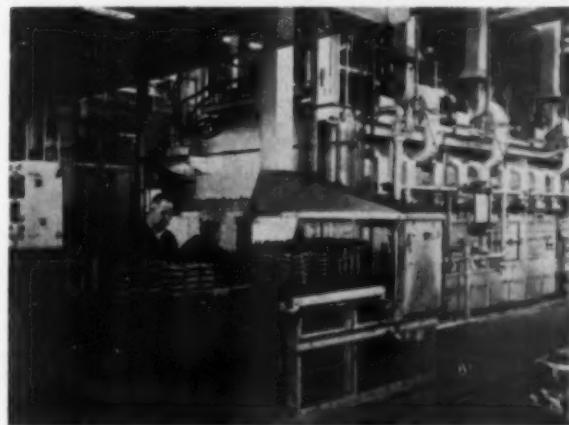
Close-up of radiant-tube-heated gas carburising furnace.
